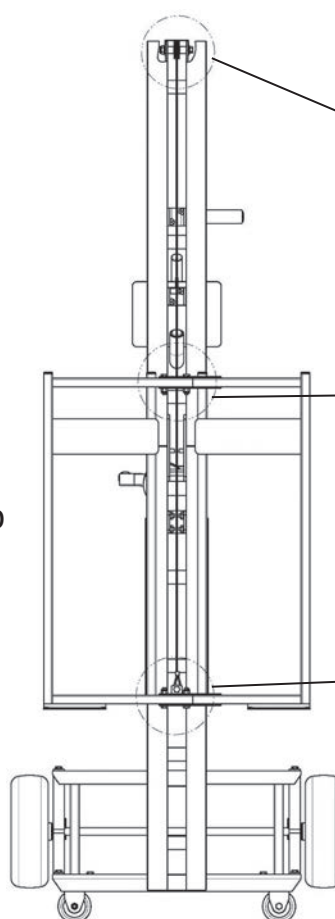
shows proper cable routing on the front side of lift (cable travels between main frame and cradle).
